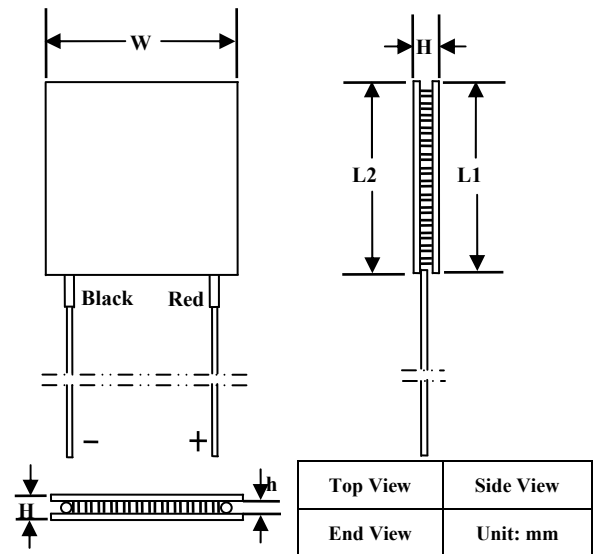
Mechanical Dimensions of Non-sealed ATE1-7
